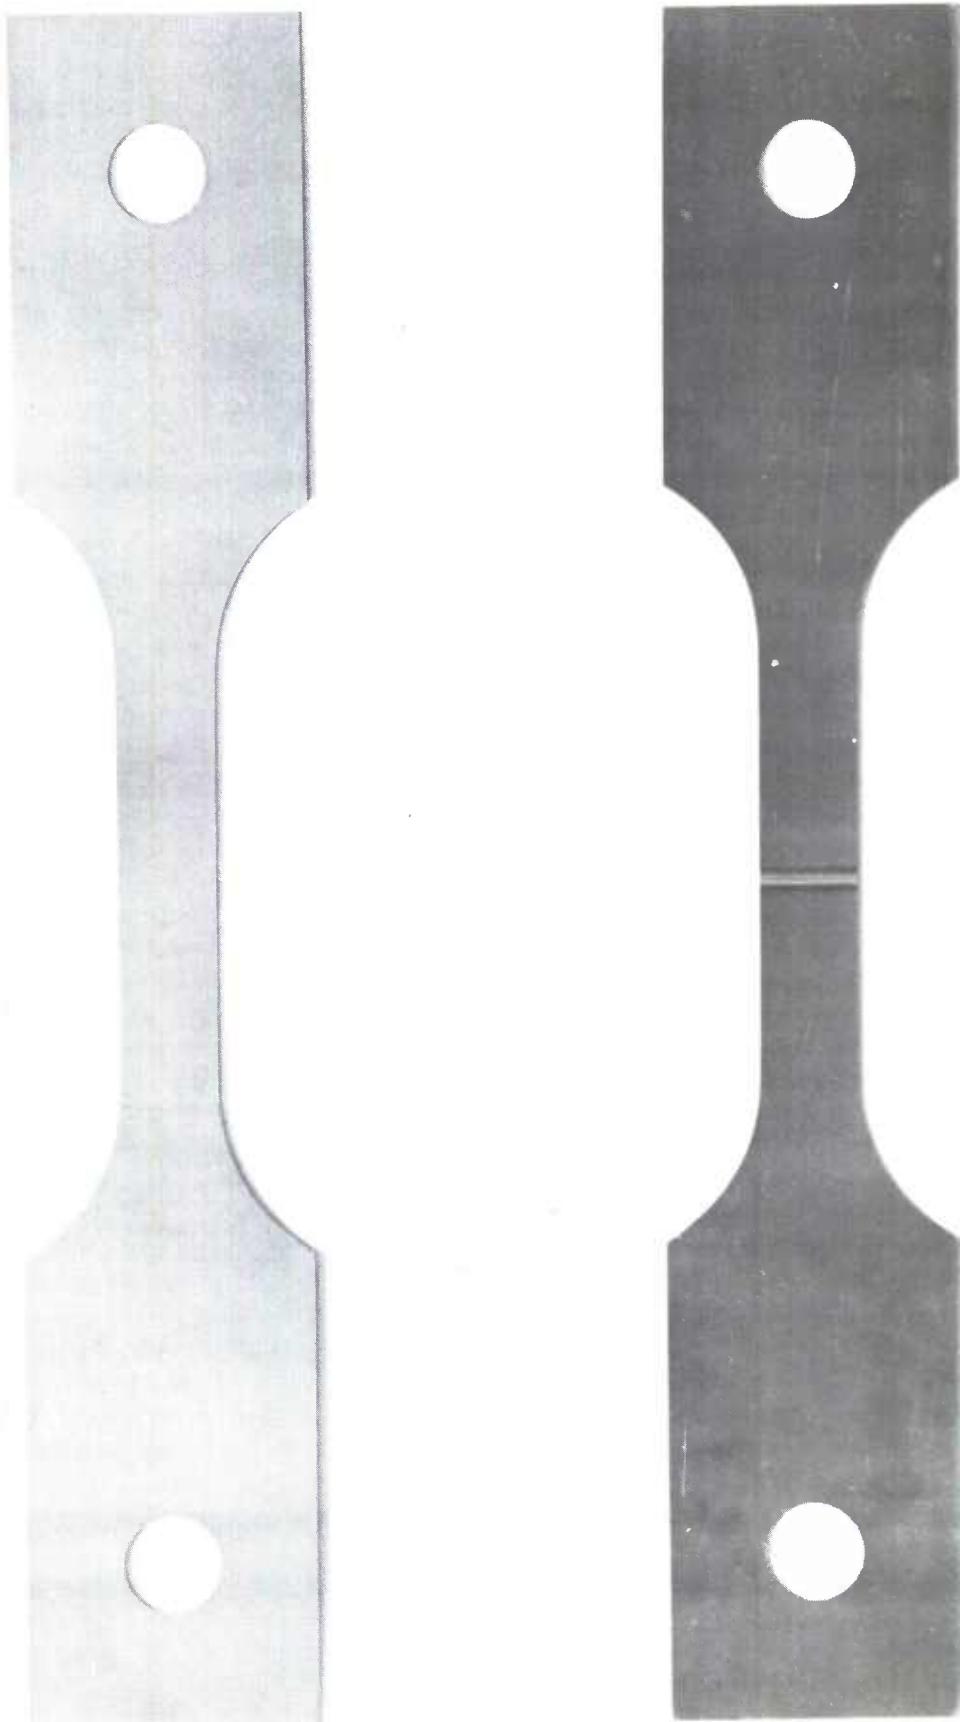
Photograph of Parent Metal and Welded Flat Tensile Specimens
